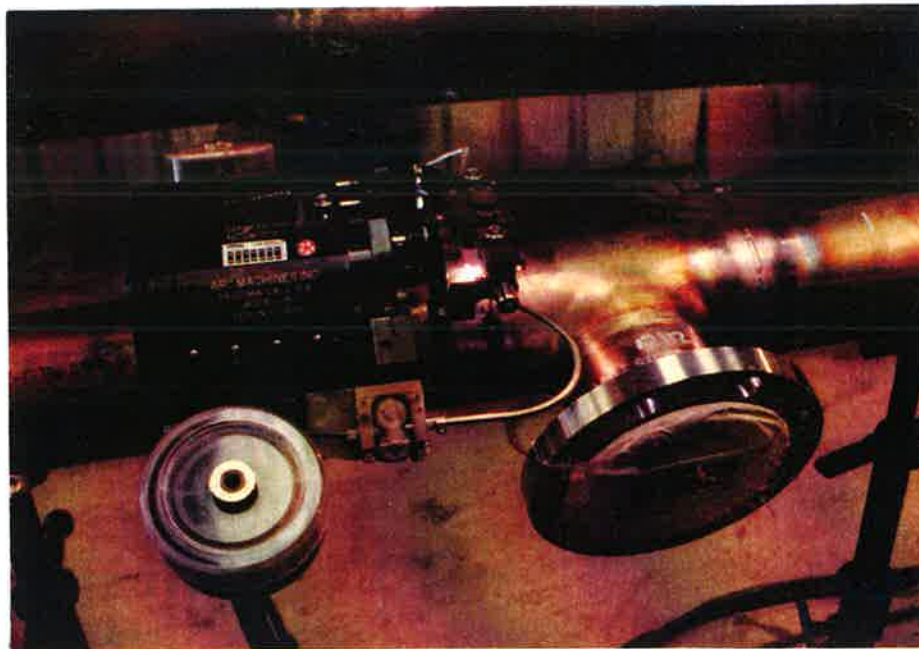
Automatic orbital weld head welding copper-nickel firewater piping.
